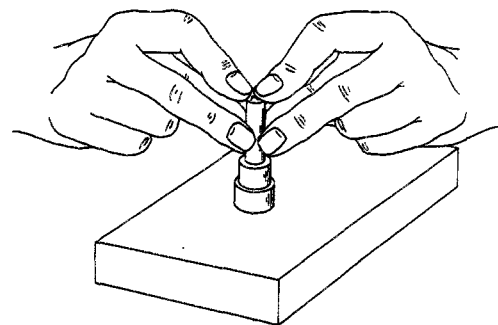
LAPPING FUEL INJECTION NOZZLE
